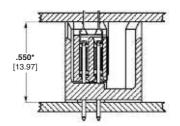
Double-Row, Two-Piece Receptacle and Two-Piece Shrouded Header \*Mod II Shrouded Header Height
